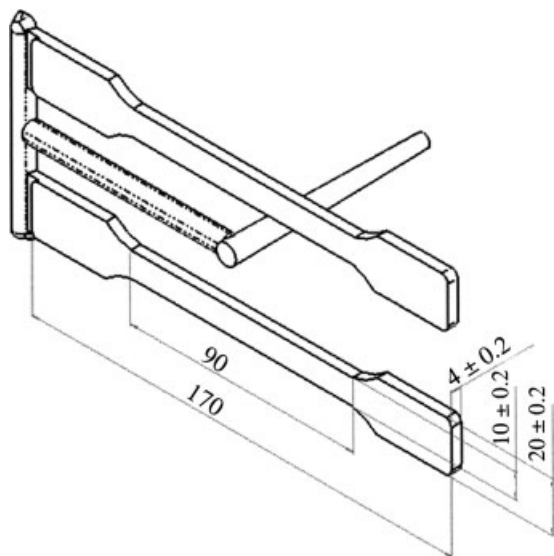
Schematic of the injection molded specimen (dimensions are in mm).
